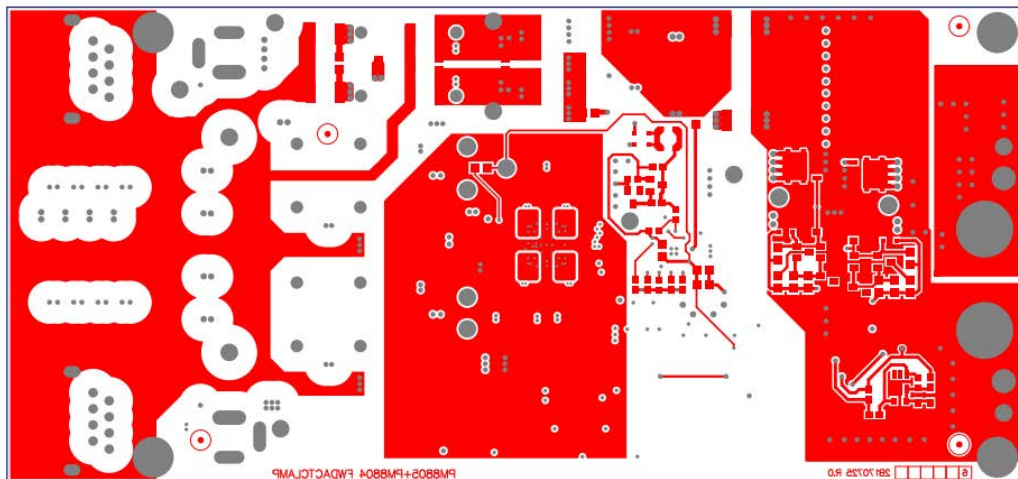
STEVAL-POE005V1 reference design PCB layer 6
